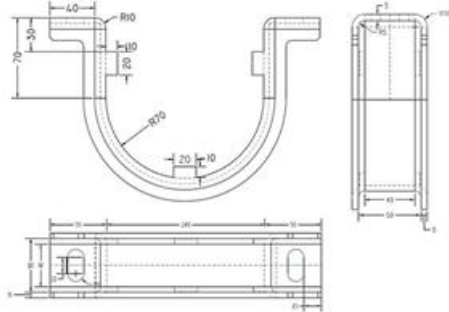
Figure Showing the Front View, Side View & Top View of the Existing Bracket
